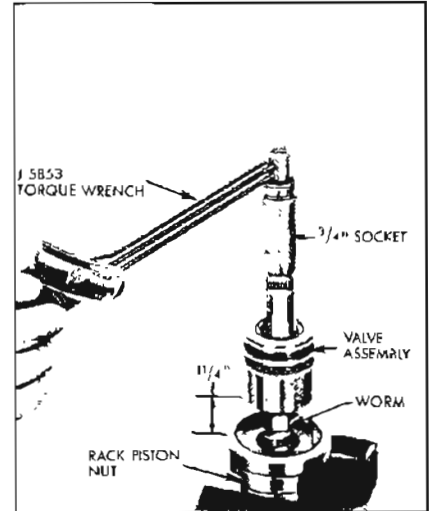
Checking Rack-Piston Nut Ball Preload
